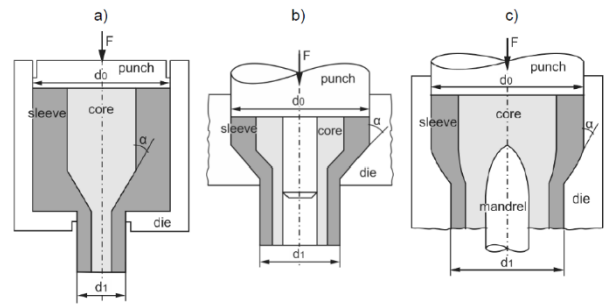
Different variants of bi-metallic extrusion a.) forward extrusion b, c.) tube extrusion [12].
